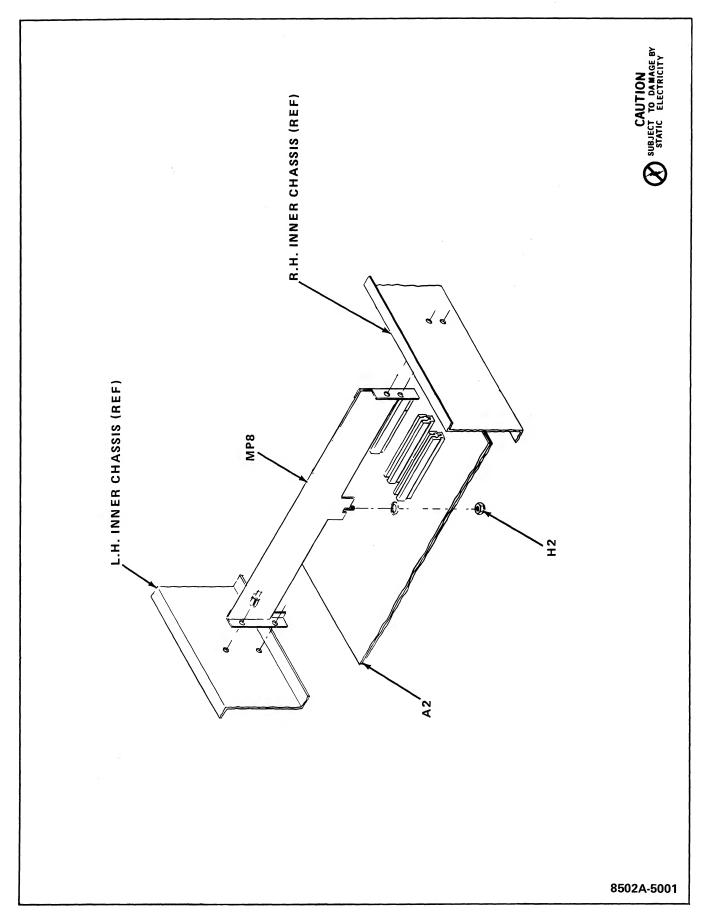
Final Assembly 15 Inch Pack (cont)
